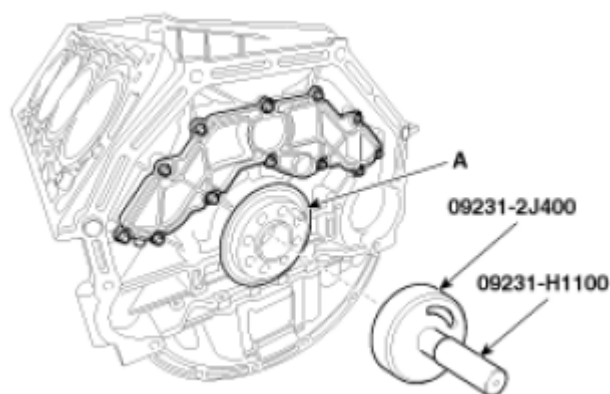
Identifying Oil Seal, Special Tool And Plastic Hammer
